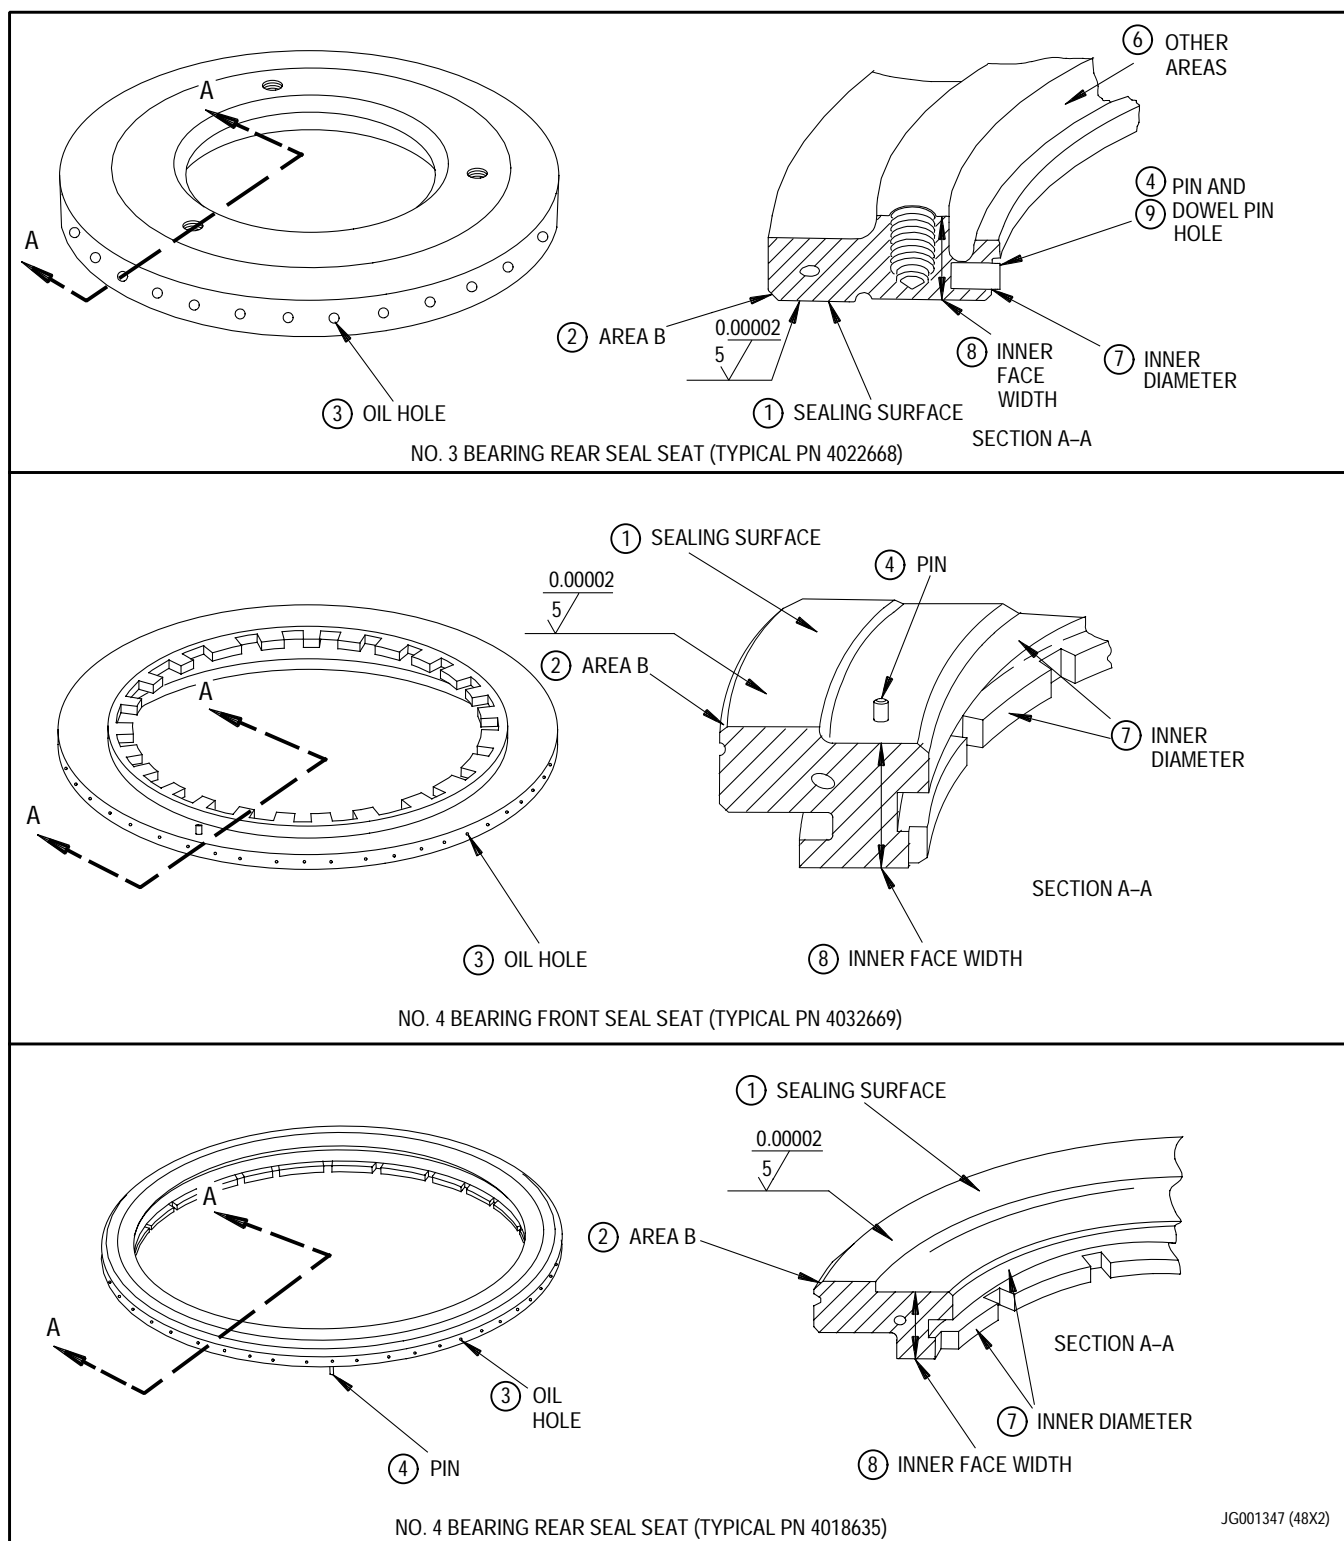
No. 2, 3, and 4 Bearing Seal Seats - Inspection (Sheet 2 of 2)
